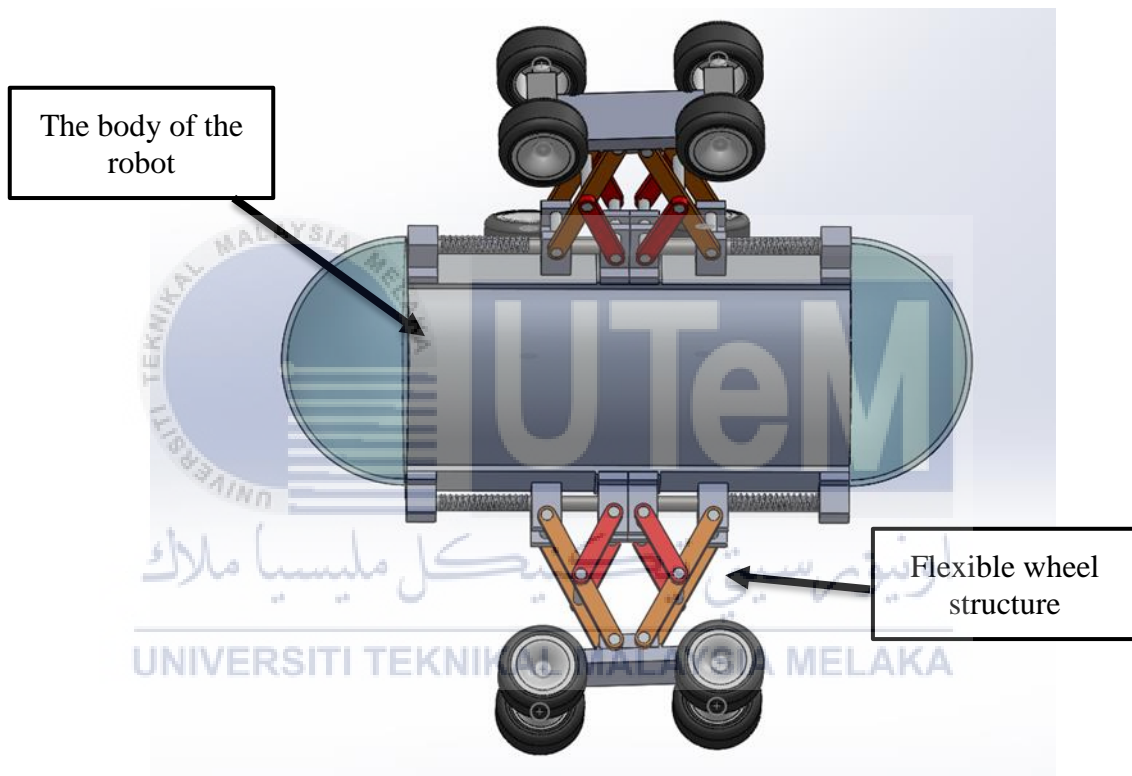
The Right Plane View of the Designed Pipeline Inspection Robot
